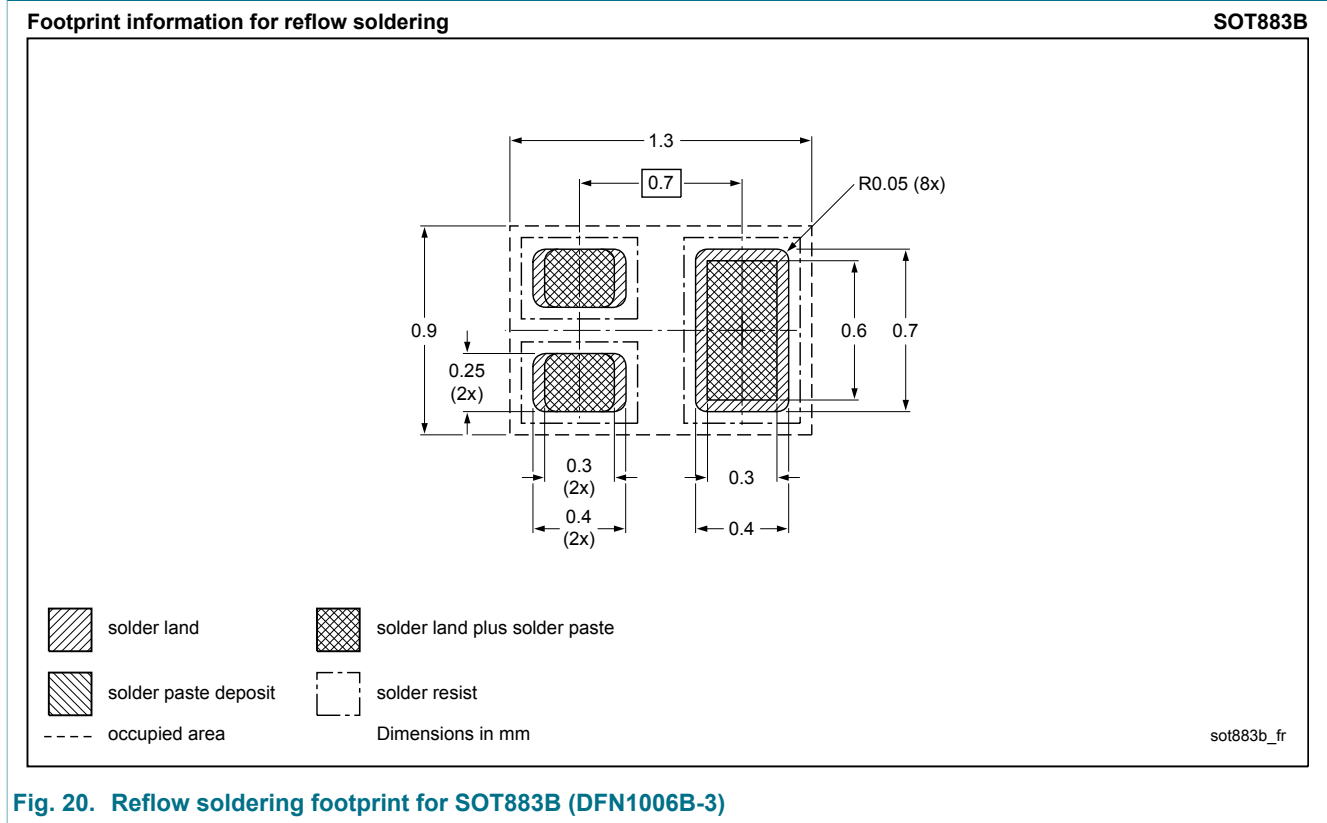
Reflow soldering footprint for SOT883B (DFN1006B-3)
